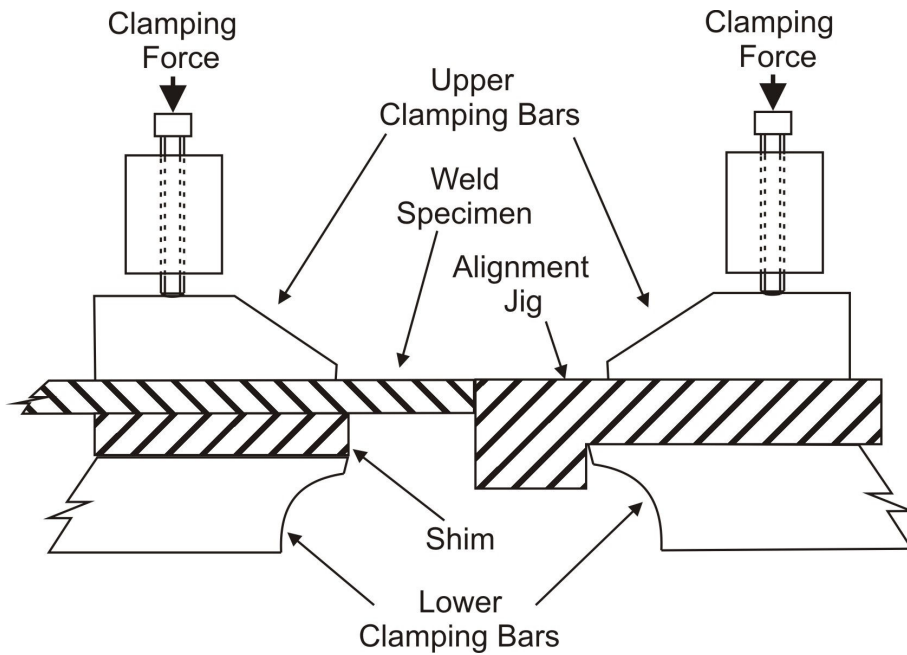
Schematic showing the shim and alignment jig used to align the thin specimen with the welding torches.
